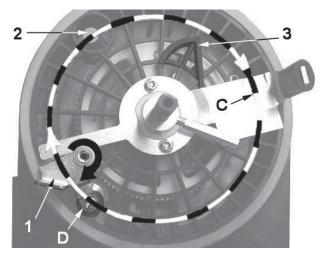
Switching parts of the low-level control for grease (when the reservoir is empty).
